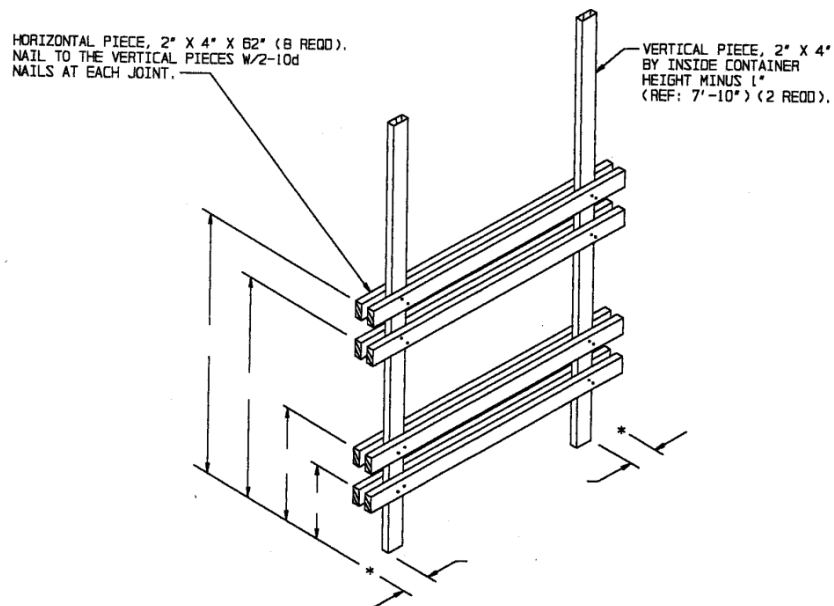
Examples of fill assemblies (sheet 1 of 2).
